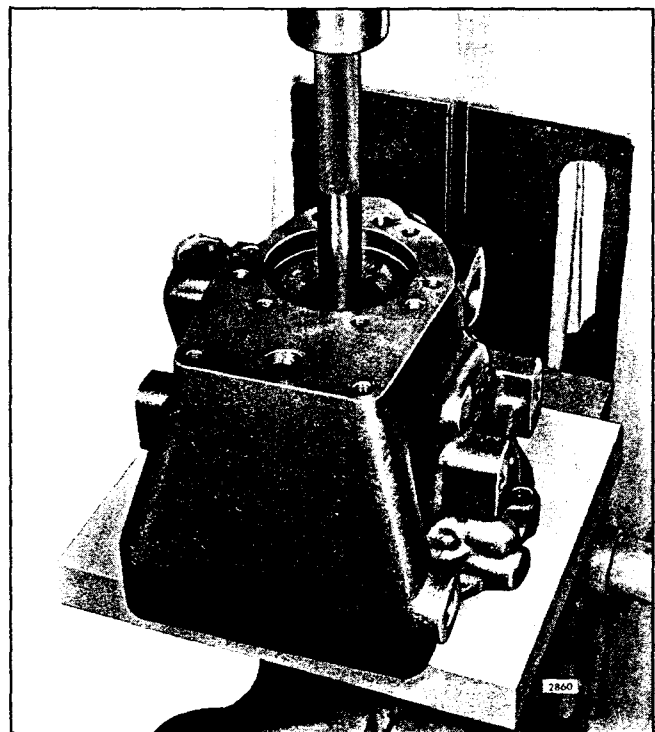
Removing Drive Shaft Bushings from Gear Housing
